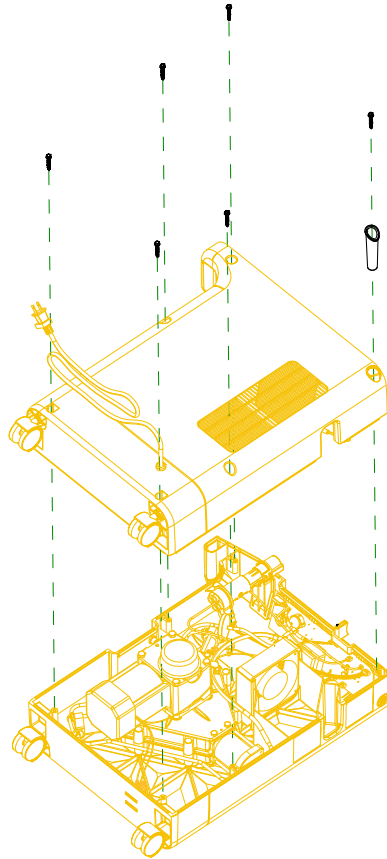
CABINET HEX SCREW PLACEMENT
